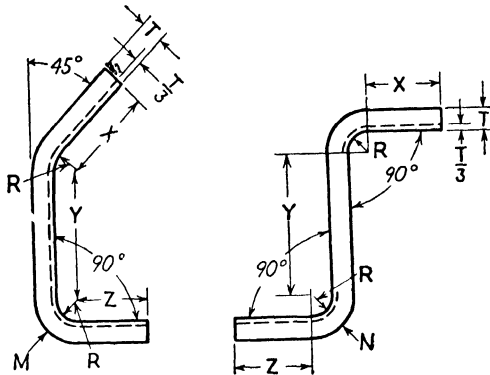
Illustrating the simple methods employed for calculating the developed lengths of formed blanks.
